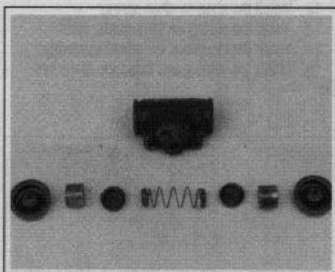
Once cleaned and inspected, the wheel cylinder is ready for assembly
